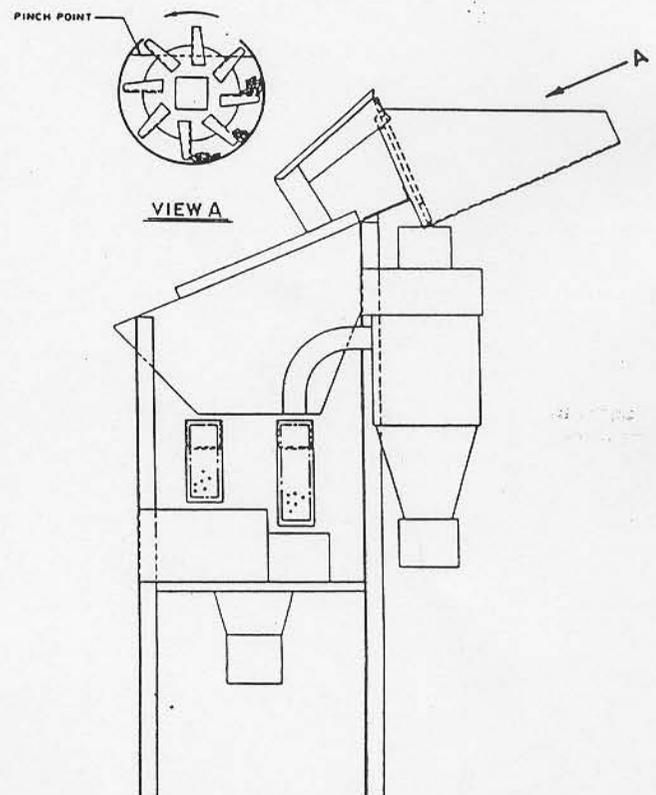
Peanut sample cleaner with a finger-wheel feeder.
